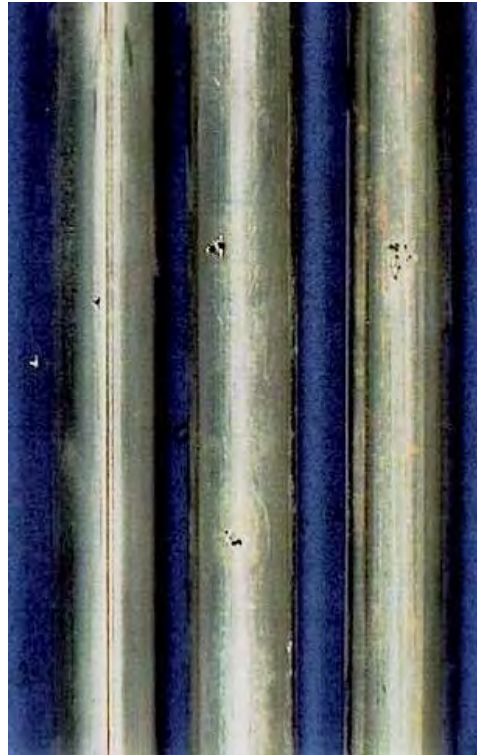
Type 304 stainless steel exchanger tubes failed from pitting corrosion on the shell side in cooling water service after 2½ years without biocide treatment.
